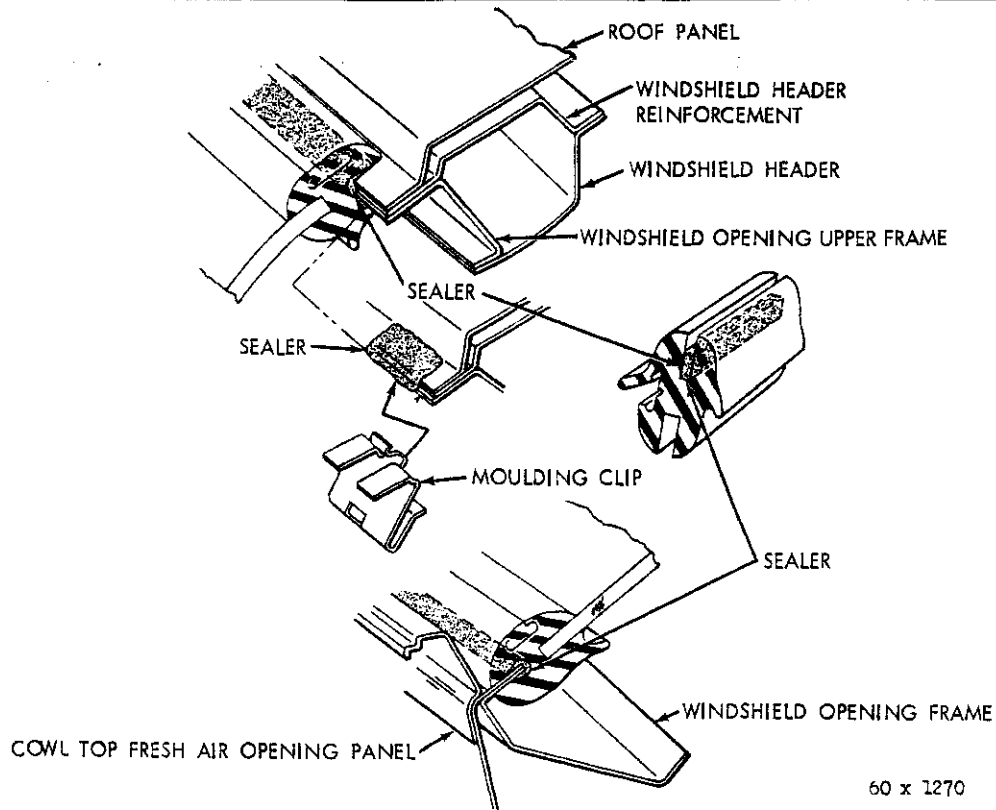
Windshield Weatherstrip Cowl and Roof Panel Sealing
